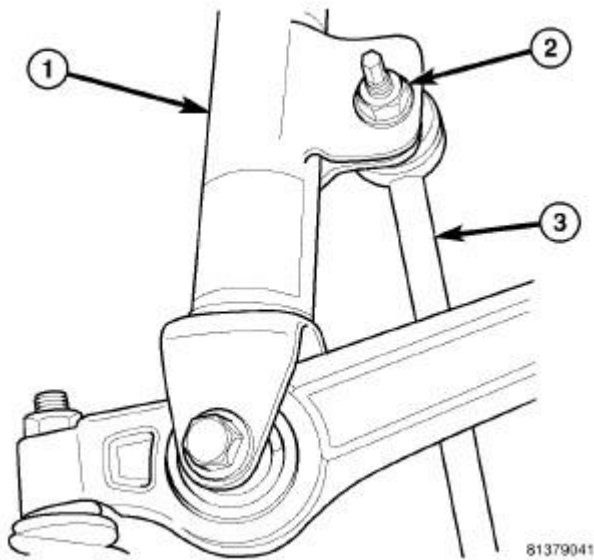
STABILIZER LINK AT SHOCK ASSEMBLY
